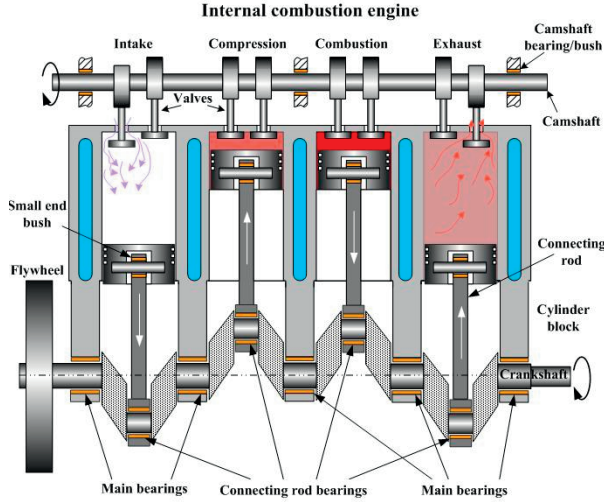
Crankshaft model for a four-cylinder IC engine.
